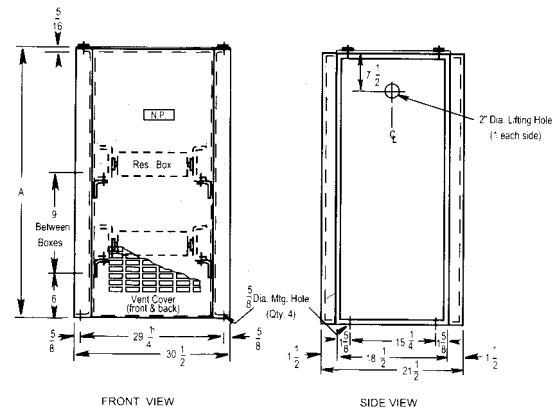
Mounting rack for IC9141 resistor boxes with perforated metal covers front and back
